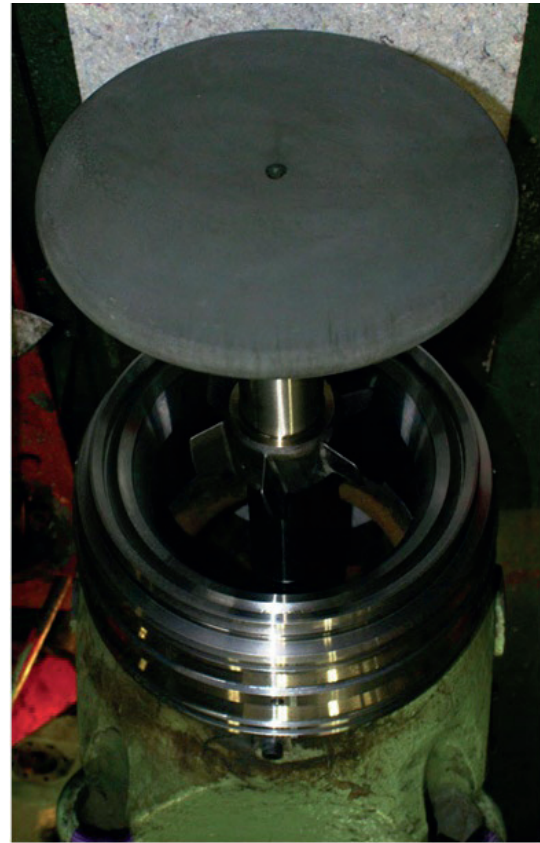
Picture of the MC50 Nimonic 80A valve spindle with 600 μ m thick MW-C² coating on the valve face and outer diameter, prior to initial engine installation.
